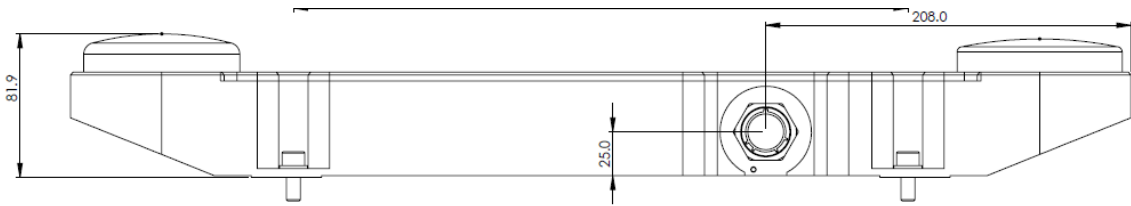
HPLS[®]-2G – BAR 0.5 Front Panel Dimensions
